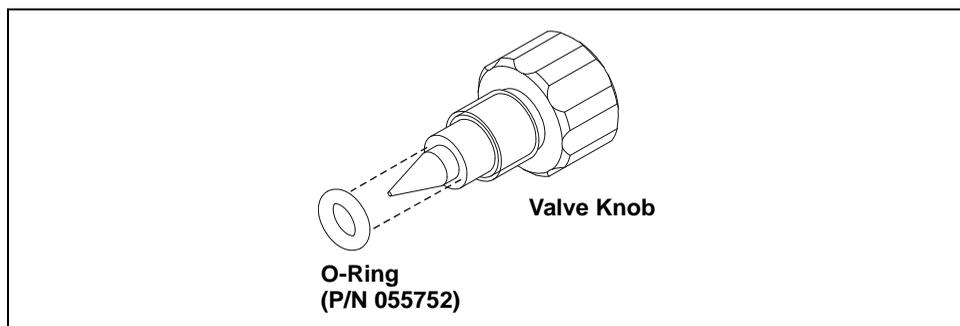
Waste Valve or Priming Valve O-Ring Replacement
